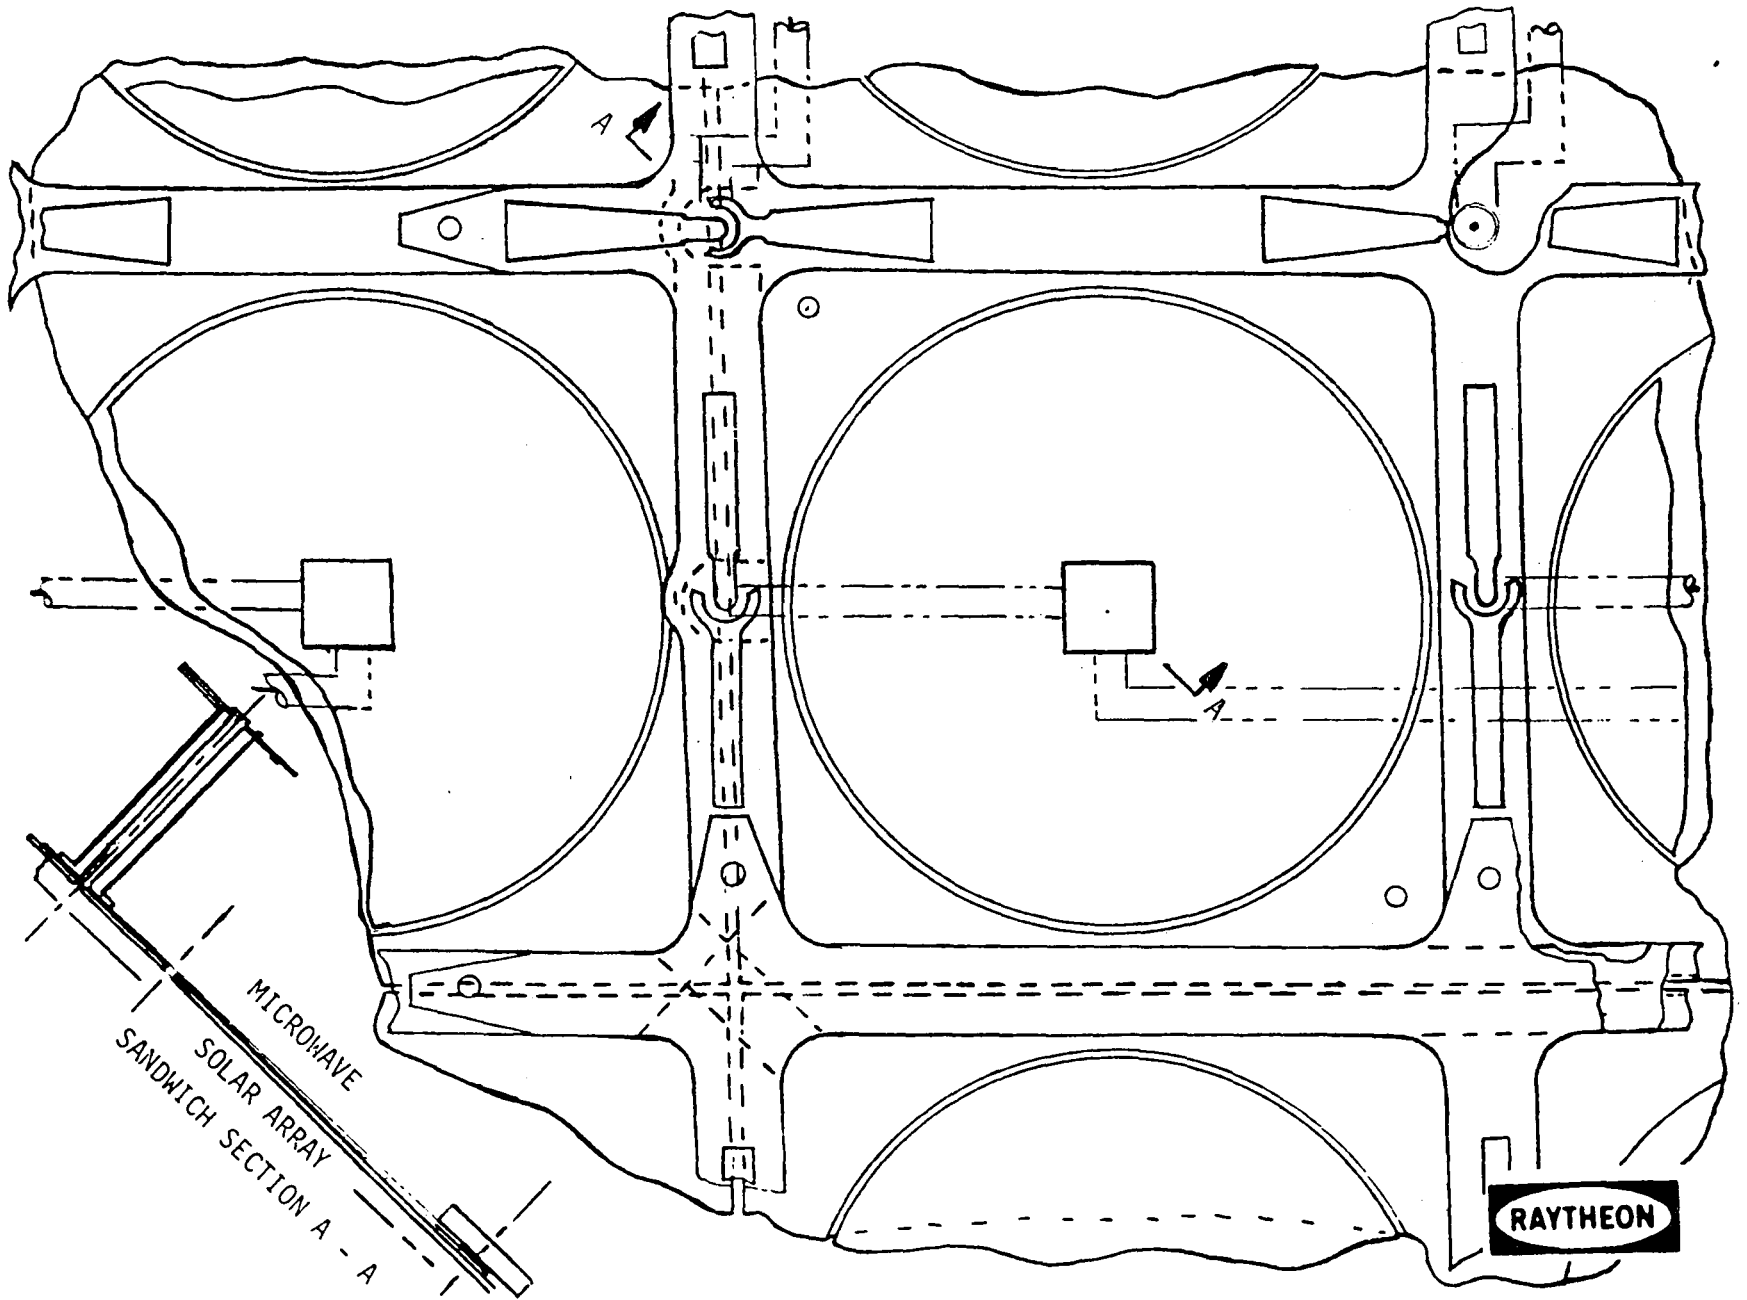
Subarray Layout - Typical Corner and Section
